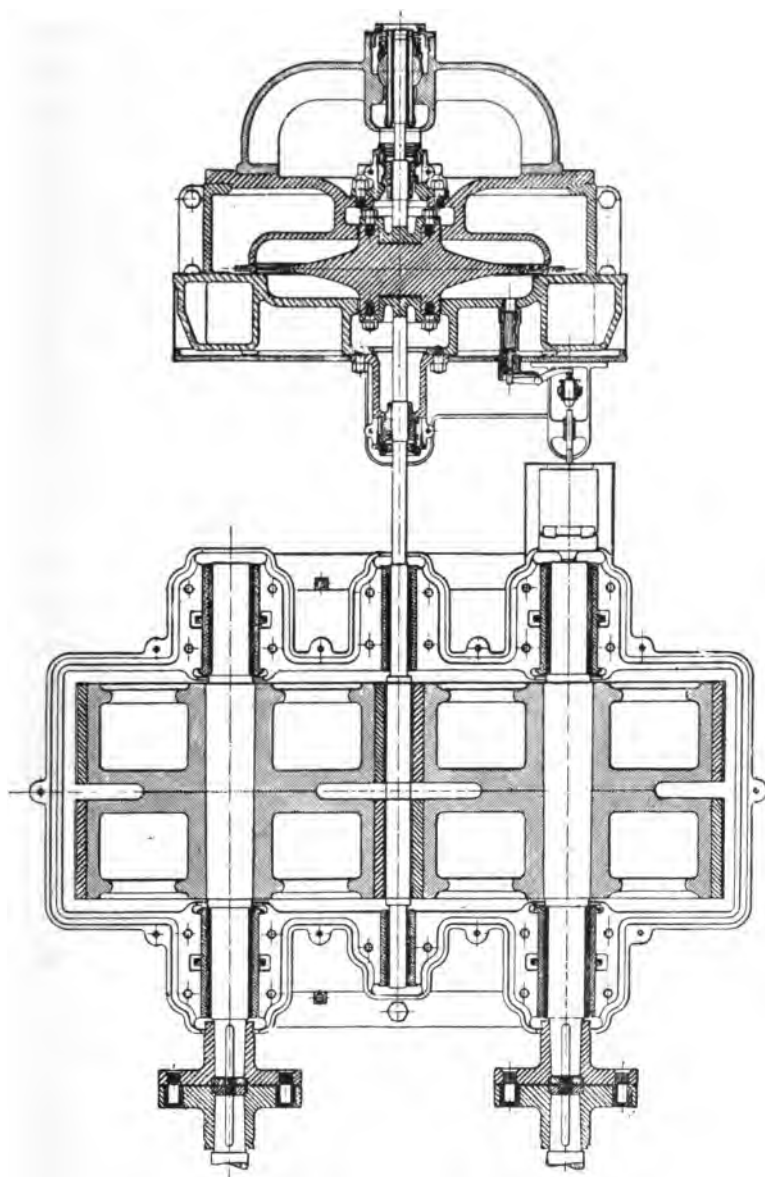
Sectional Plan of 300-H.P. De Laval Steam Turbine.
